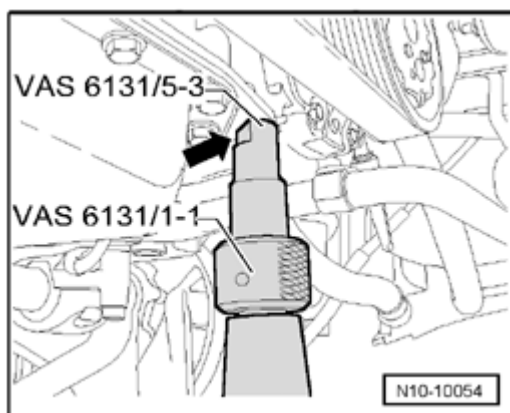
Adjusting Height Level Using Universal Engine Support VAS 6131/1-1
